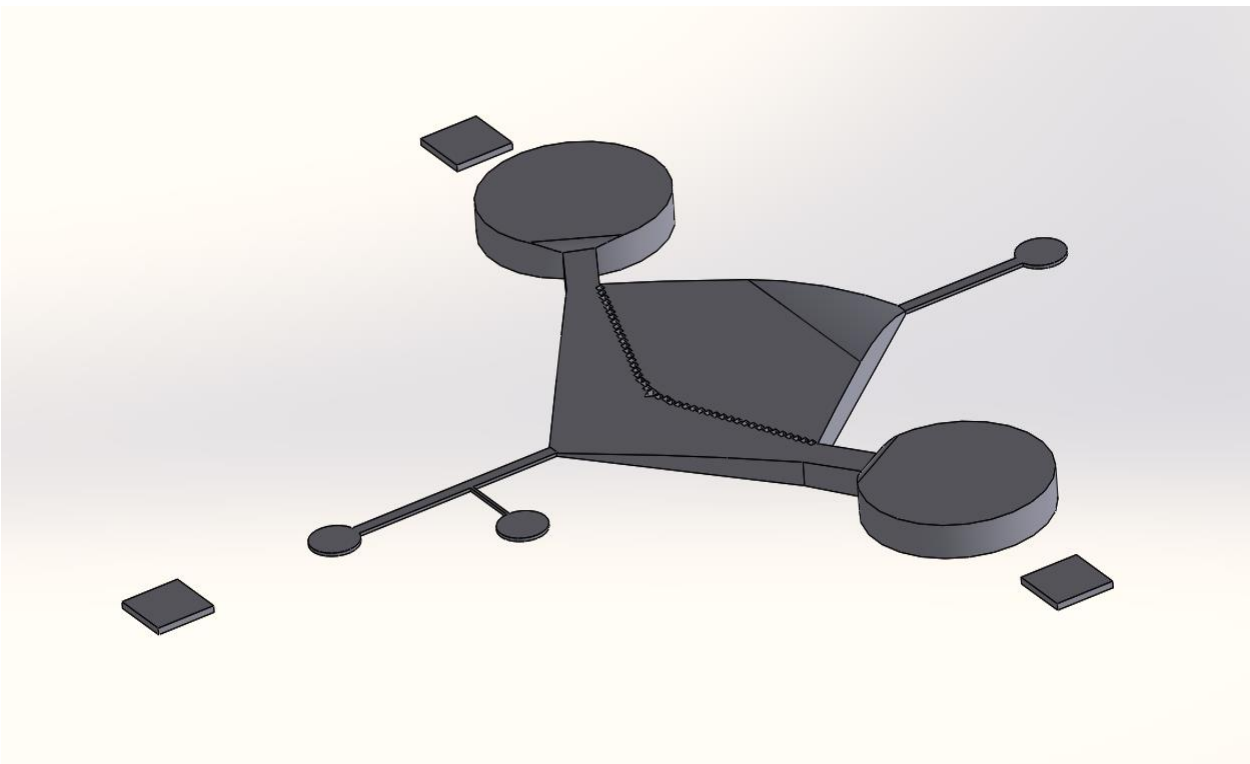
(Chapter 6) 2PP printing master mold design for bubble trapping device (second).
